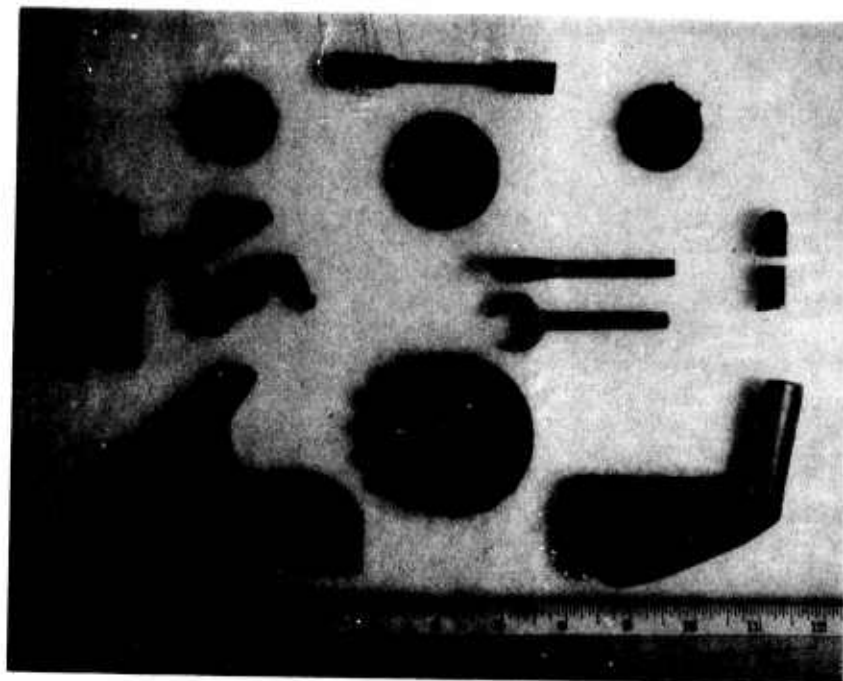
All of the parts cast on the prototype Hipocast machine.
